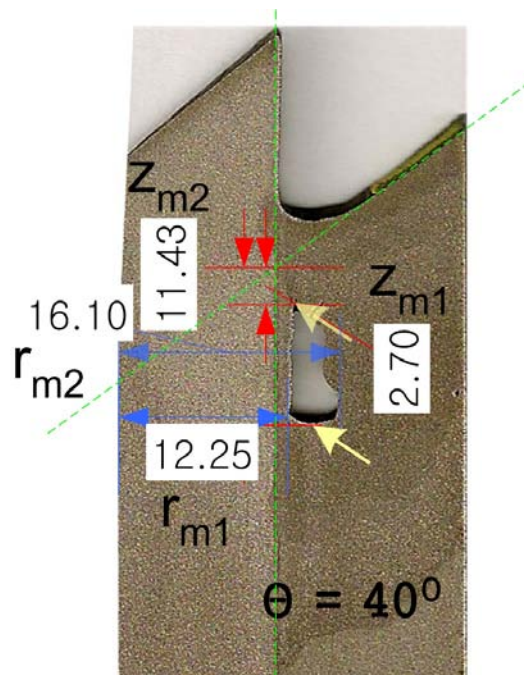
Flaw #4 508 from Interface J-weld and Nozzle O.D.
